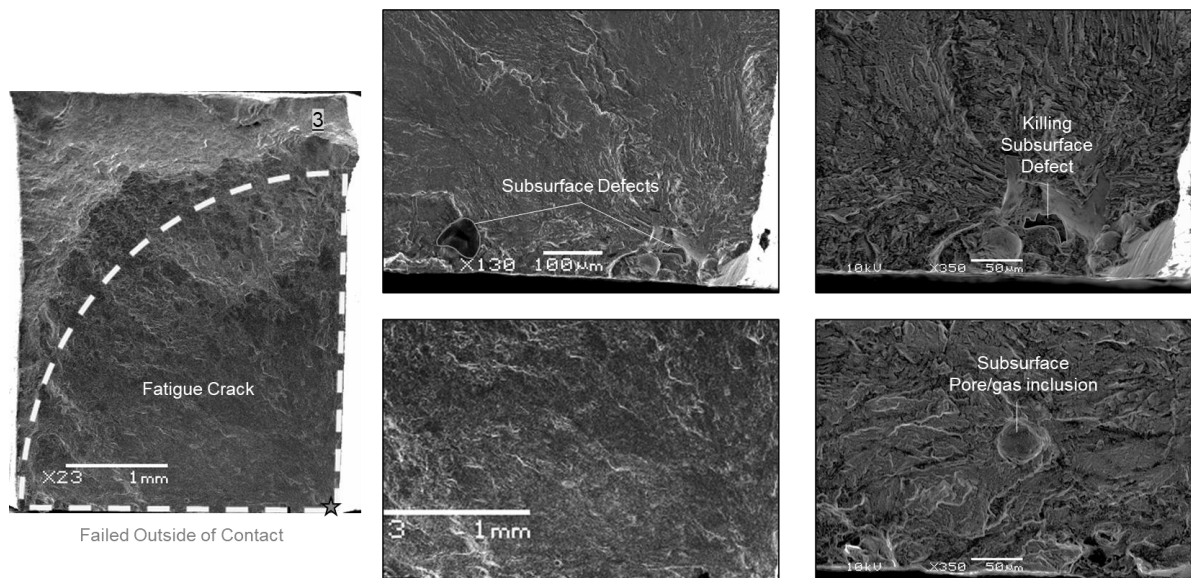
Subsurface defects significantly reduce the fretting fatigue strength of AM components.
